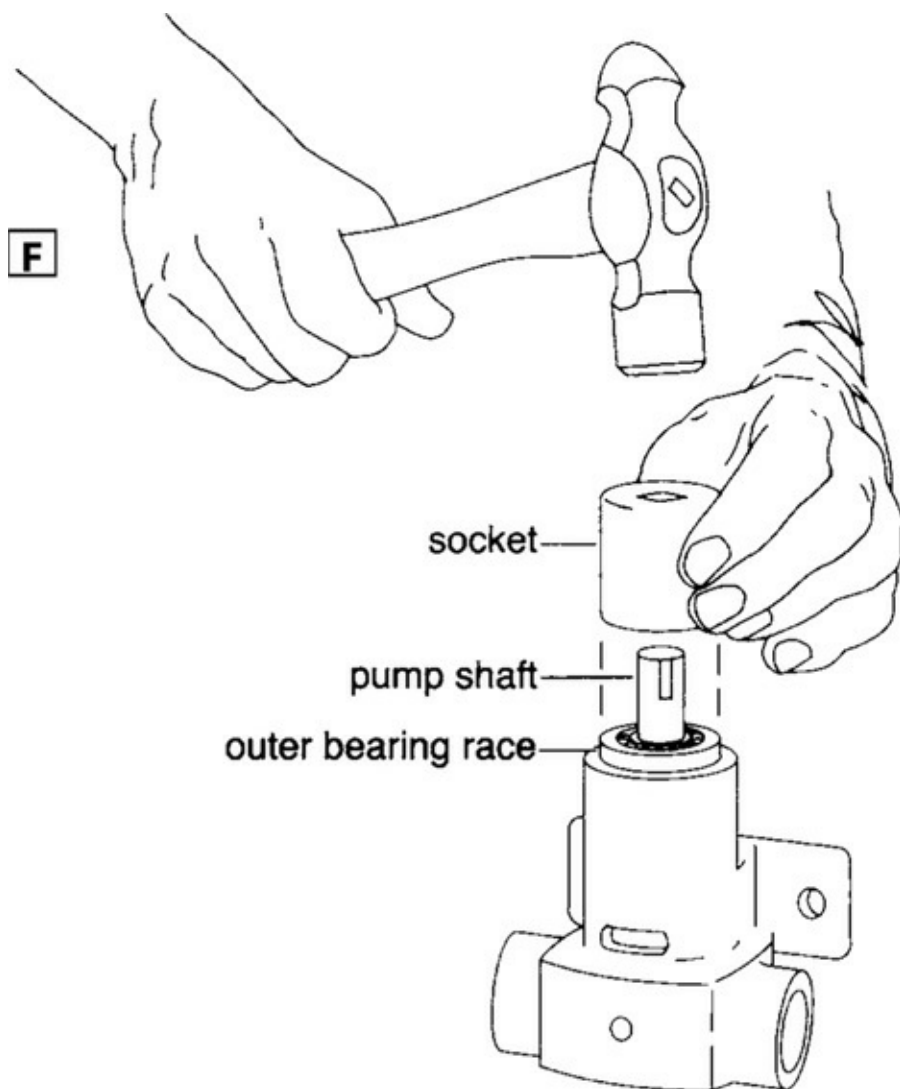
F. Driving home a bearing. Use a ratchet drive-type socket
